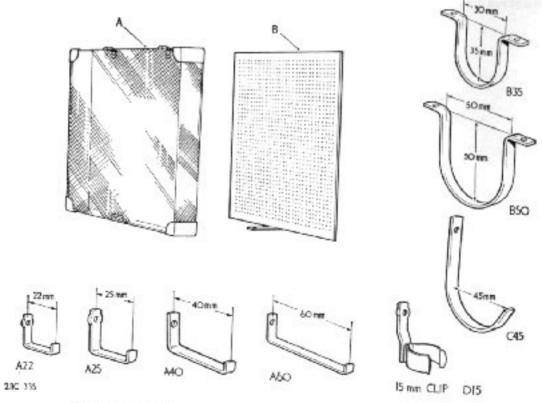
Tool board A-Wire mesh cover B-Tool board
